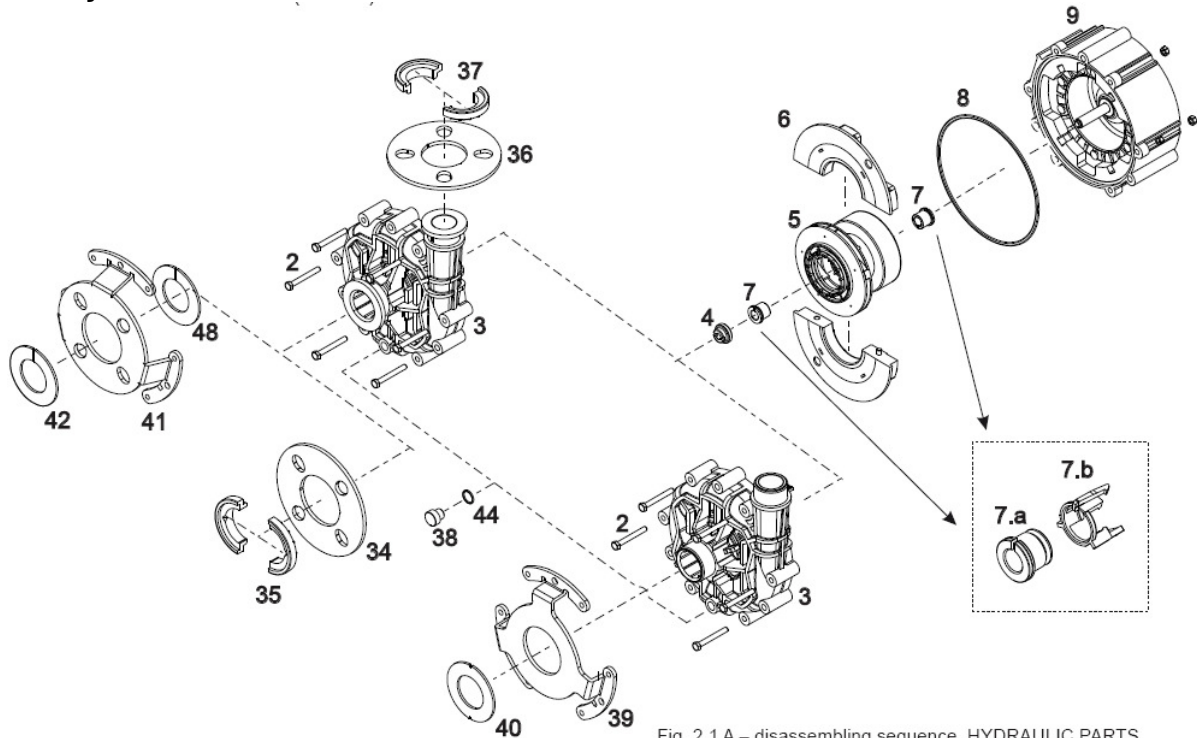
A – disassembling sequence HYDRAULIC PARTS
